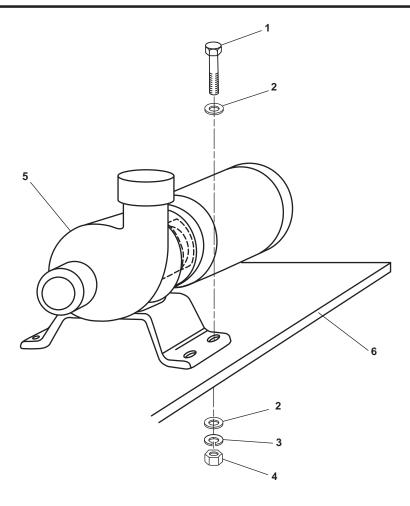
Reduction Gear Cooling Pump Mounting Hardware
